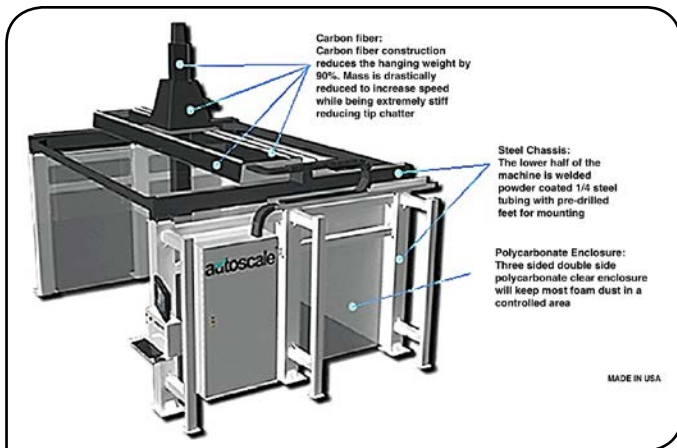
Full-scale CNC hotwire cutter for Expanded Polystyrene (EPS) foam.
